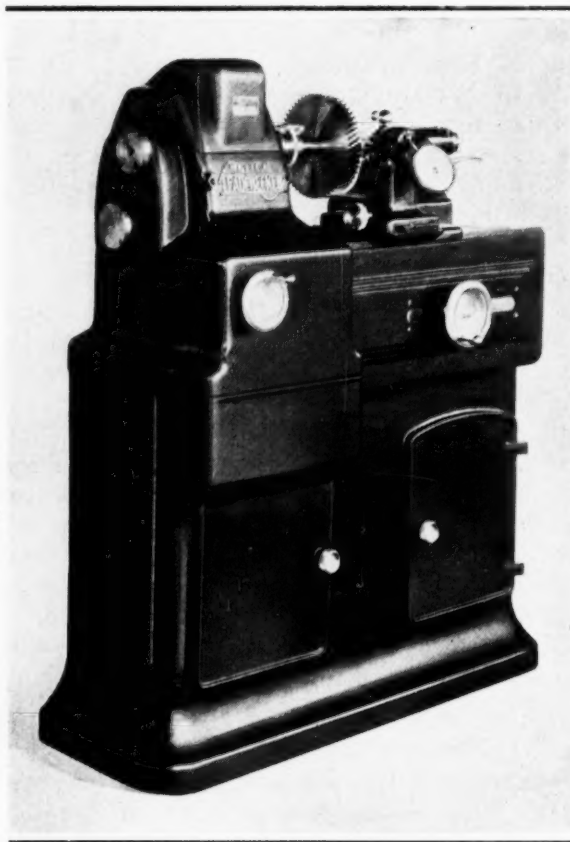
Illinois Tool Works Helical Lead Checking Machine
